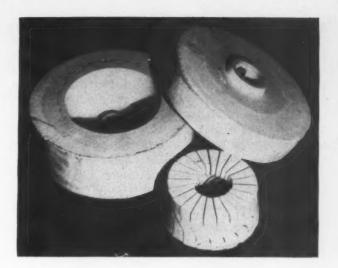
Cope and drag halves of plaster mold and cores for producing impeller castings shown in Fig. 11.
